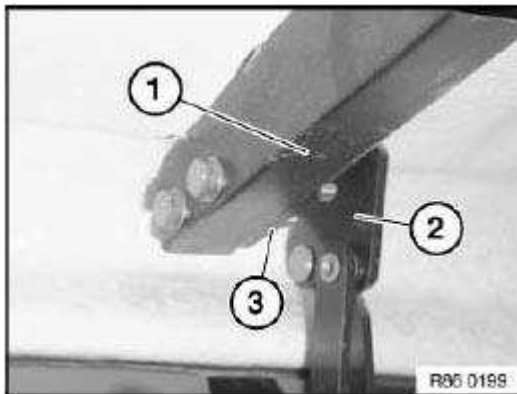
Identifying Spacer Plate, Mounting Bracket & Hinge
